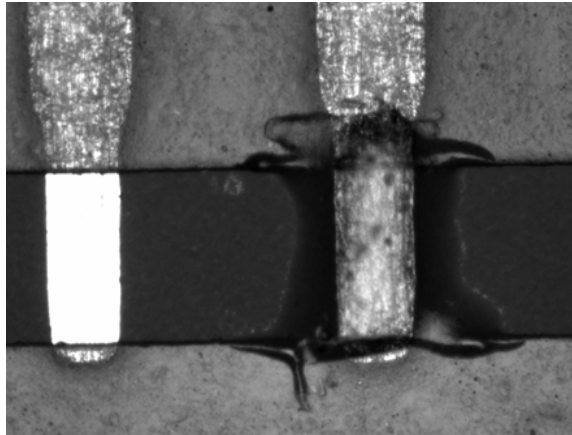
Representative Solder Pads Covered with Solder Mask.
